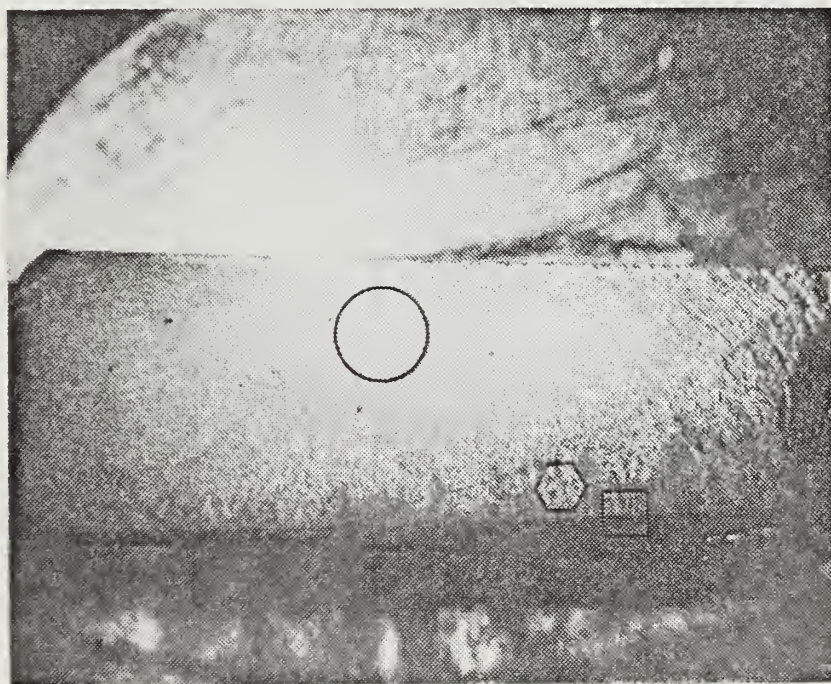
Macro-fractograph of a specimen RI-2-3 which was fractured after 477,600 cycles at 65 ksi. The entire area, except upper right hand corner, is a fatigue zone. Fatigue striations are evident at lower left corner. X10.
